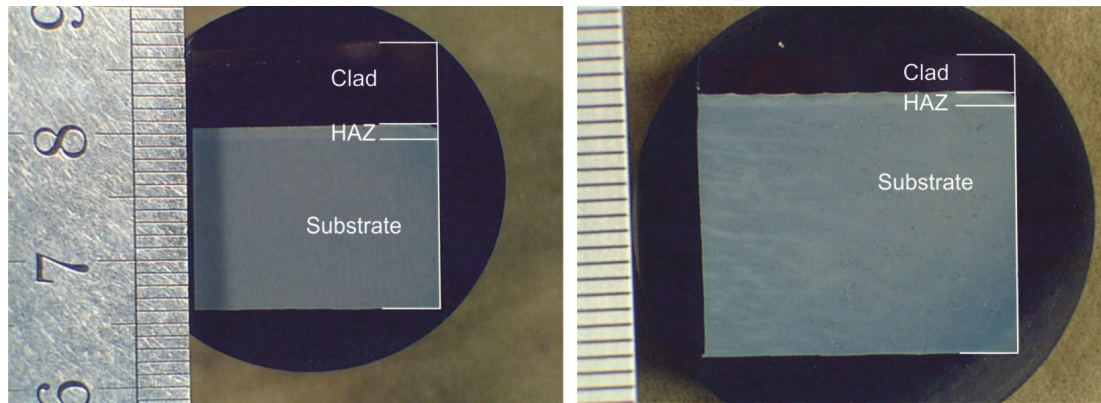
Macro section of laser clad specimen with clad layer depth of 6 mm (left) and 2 mm (right) - Showing a 4330 substrate laser clad with Inconel 625 (left) and 17-4 PH (right), both producing a thin HAZ.
